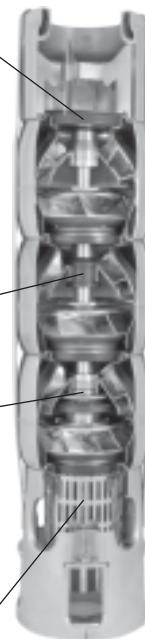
STAINLESS STEEL SUBMERSIBLE PUMP
